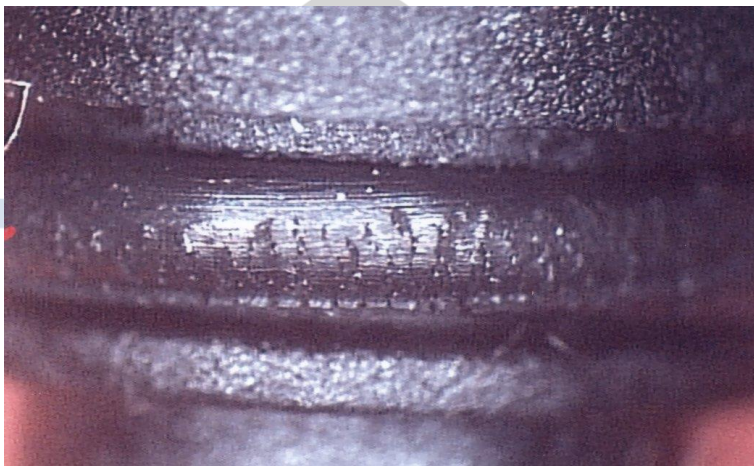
The development of ozone cracks resembles the formation of fatigue cracking, example NBR O-Ring
